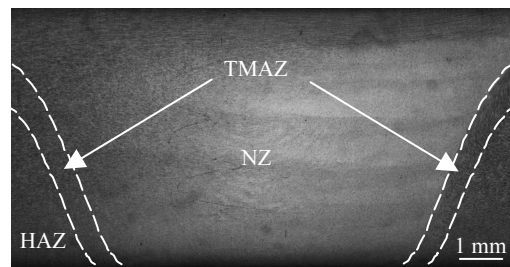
Cross-section macrograph of FSW joint at rotation speed of 1500 r/min and welding speeds of 100 mm/min
